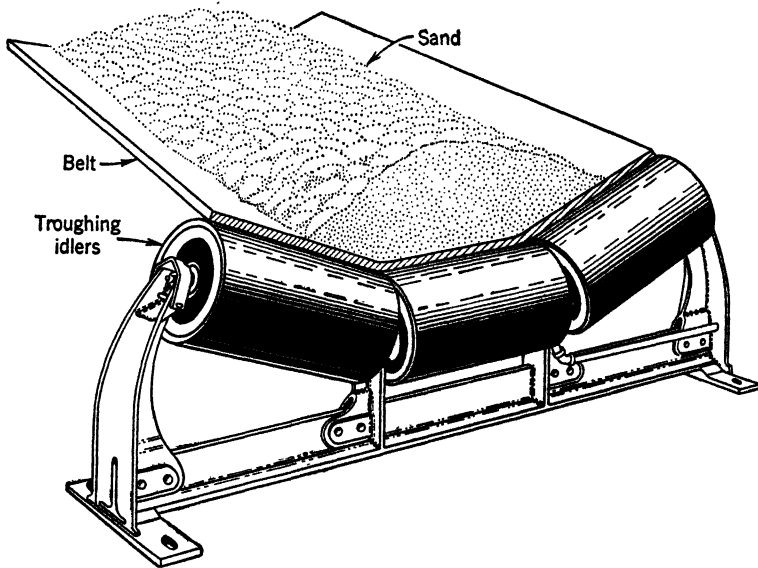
Belt conveyor carrying a sand load over three-pulley, troughing-type idlers.
